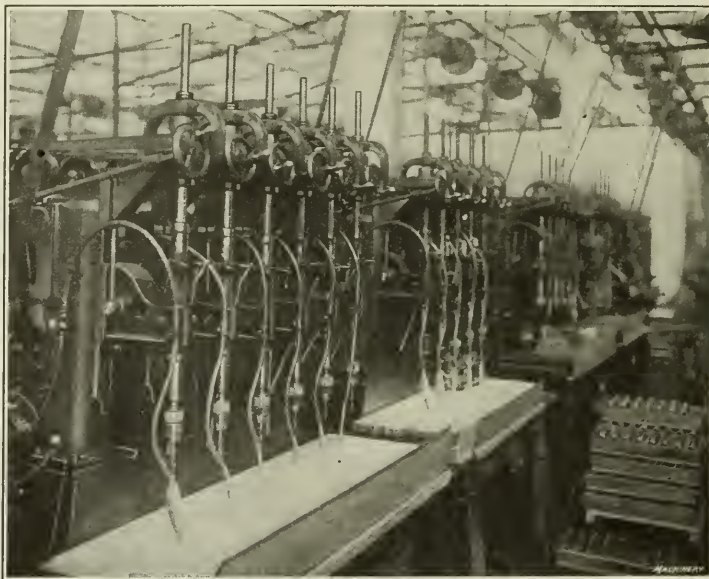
Multiple-spindle Drill Presses with Flexible Tubes for delivering Cutting Compound to Tools
